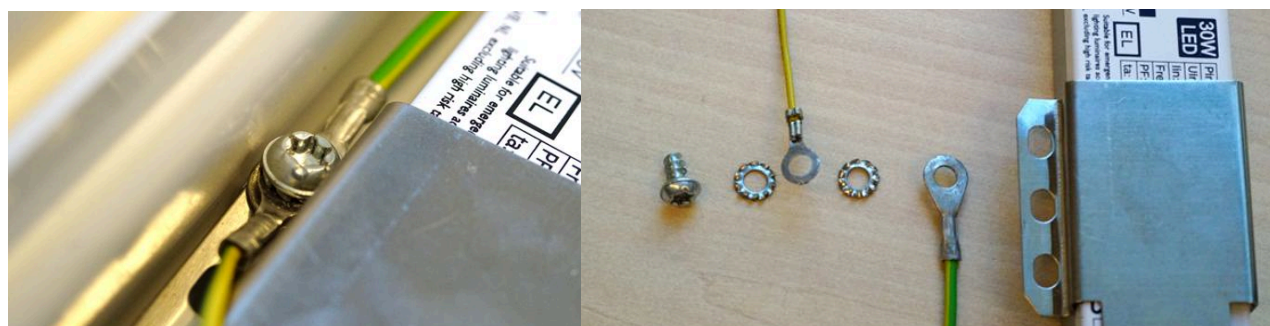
Use of O-rings, cable shoe and screw to hold the driver in place Sandwich
